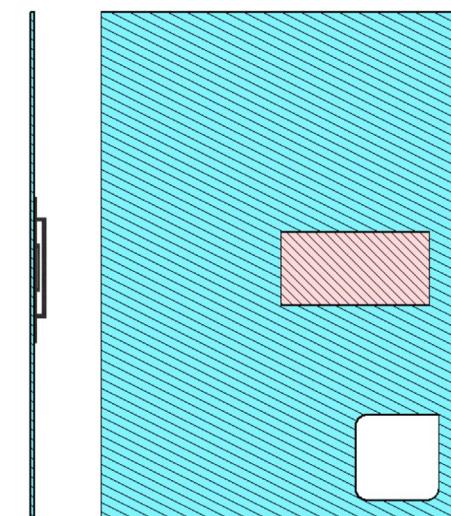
Jacket Rubber Steel Magnet 2 CAD and Section Analysis
